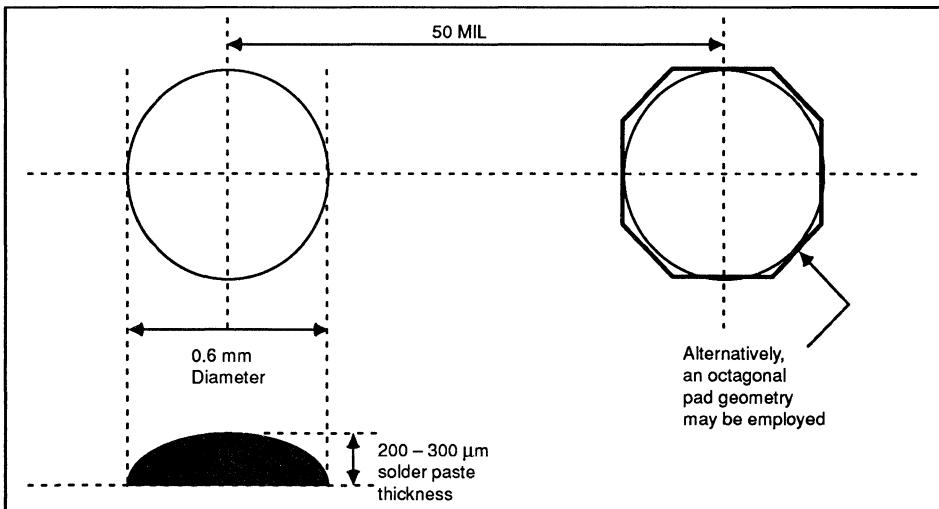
Solder Pad Design for Surface Mount Pin Grid Arrays
